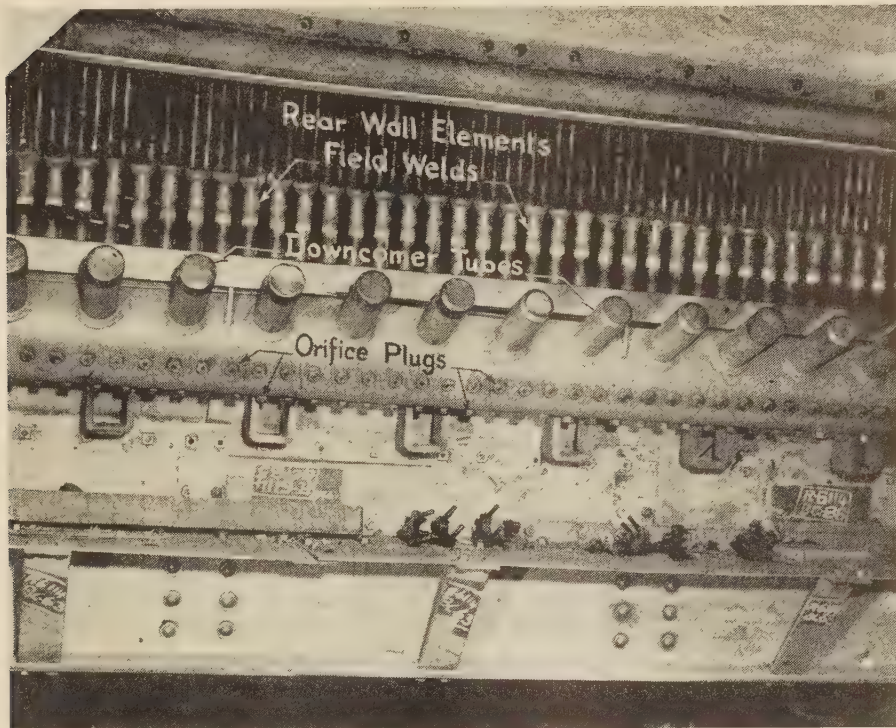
LOWER REAR-WALL-HEADER ASSEMBLY
